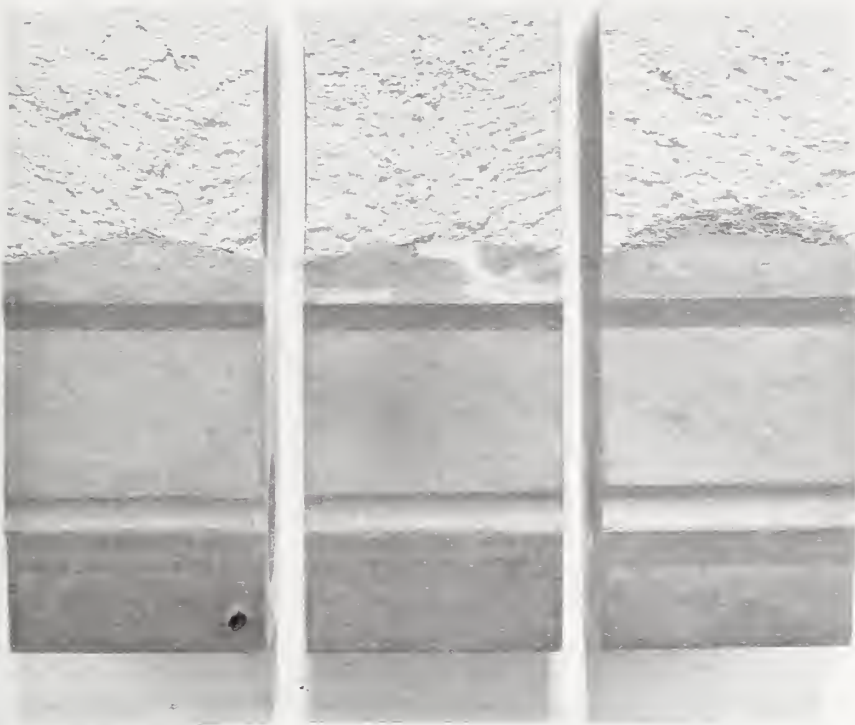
Macrophotograph of the fracture surfaces of specimens tested at 4 K.
